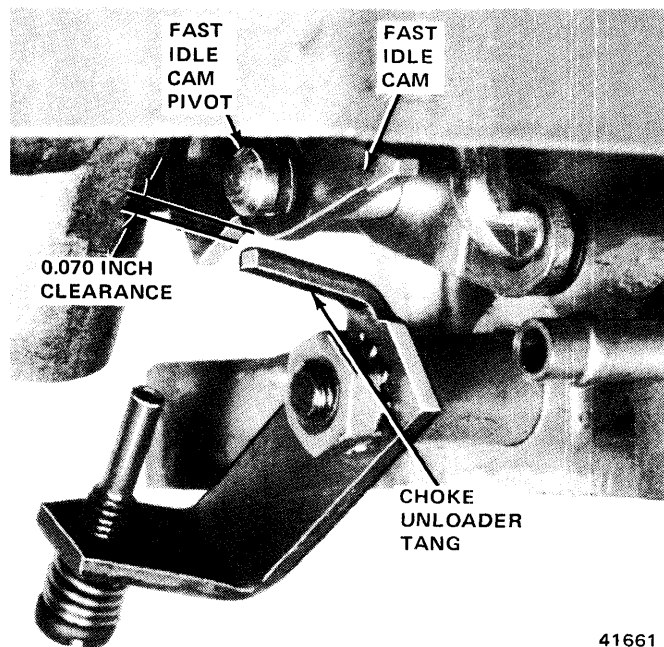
Unloader to Fast Idle Cam Clearance
